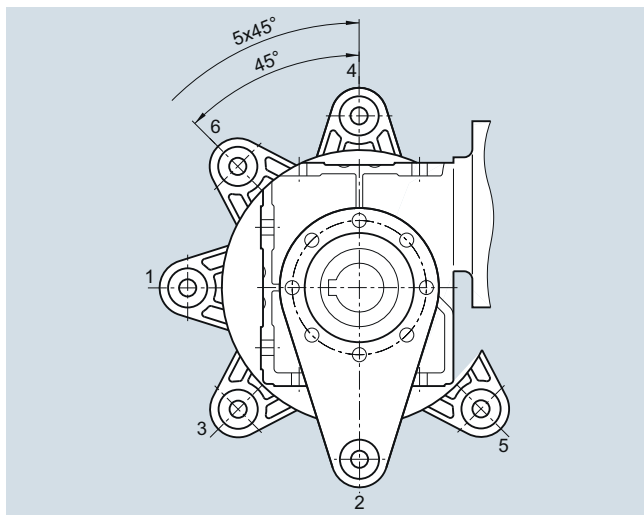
/13 Worm gearboxes S in a shaft-mounted design
